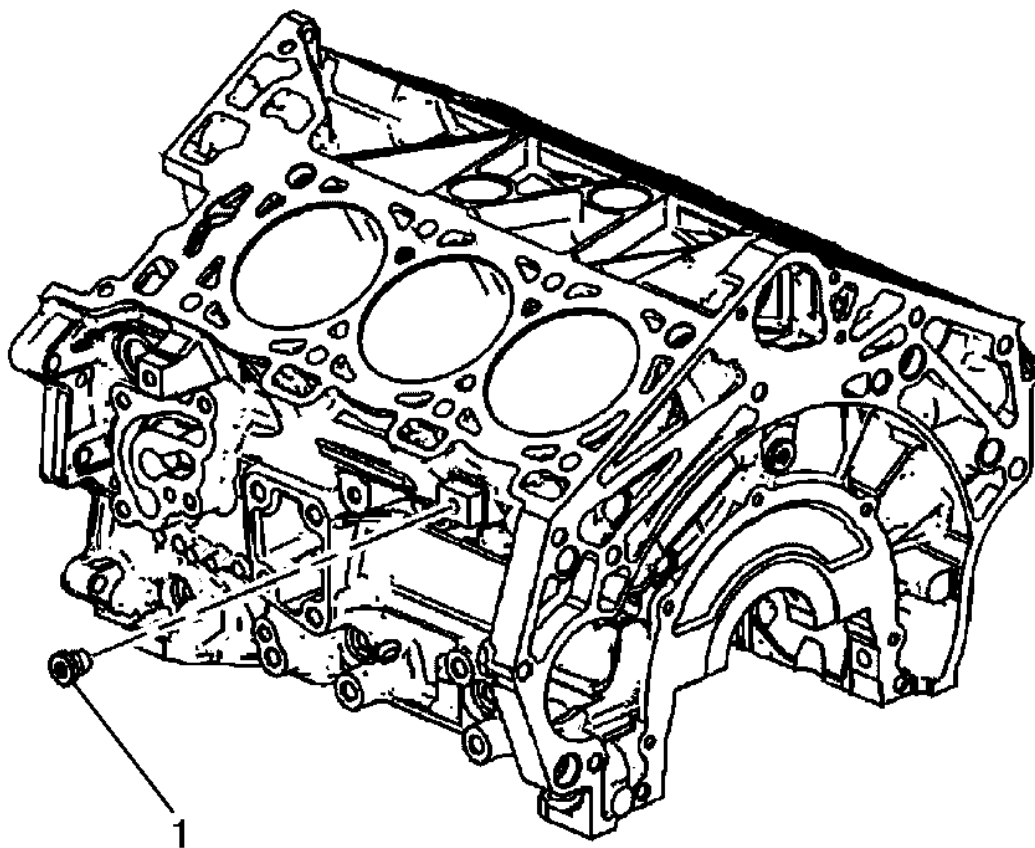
Identifying M14 Right Side Coolant Drain Threaded Plug
